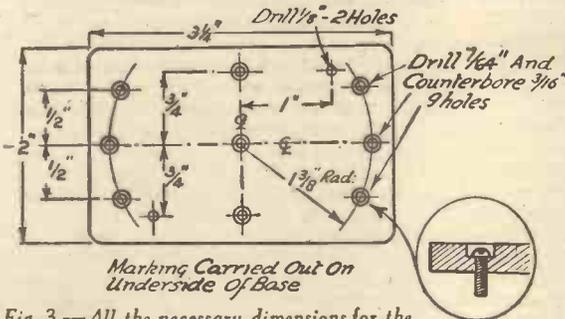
All the necessary dimensions for the ebonite base-plate are given in this drawing.
